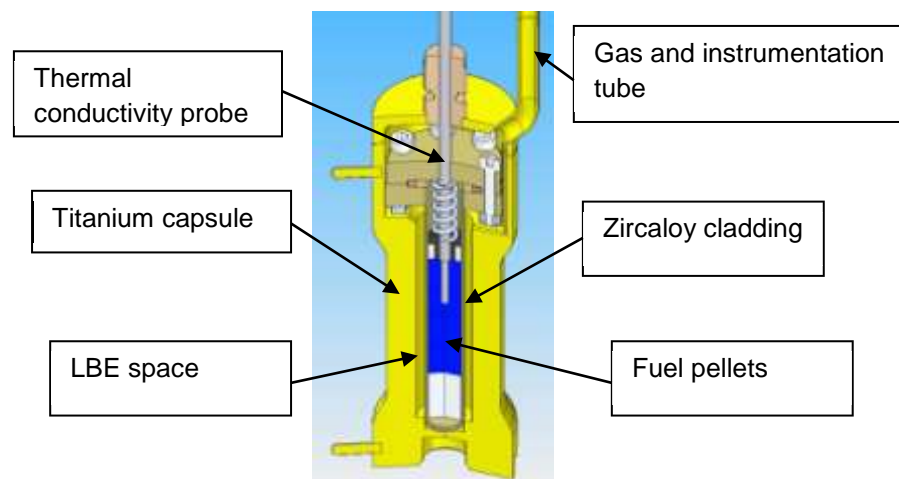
Cutaway view of the hydride fuel rodlet irradiation capsule. LBE fill is used to thermally couple the fuel rod surface to the titanium capsule.
